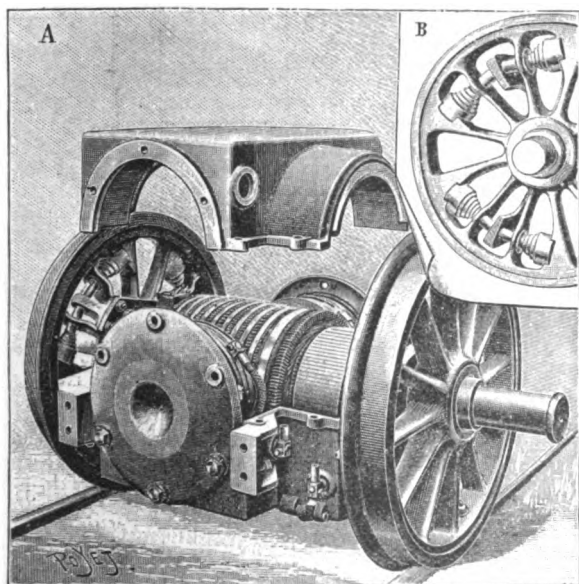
VIEW OF MOTOR AND SPRING CONNECTION WITH WHEEL.
